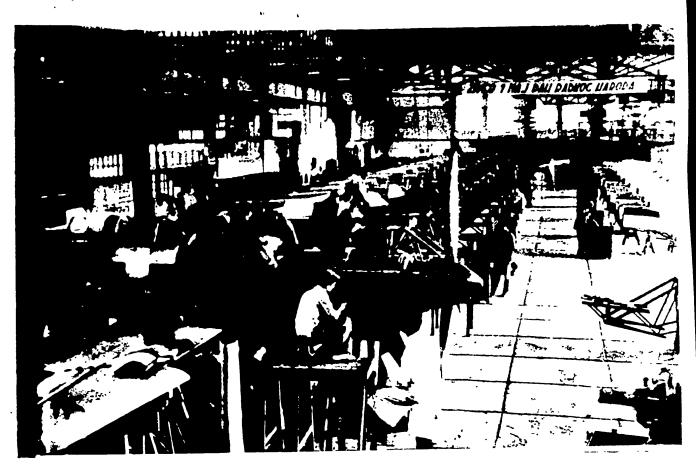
Series assembly of "S-49c" fighters in large assembly shop of the "Ikarus" Enterprise.
